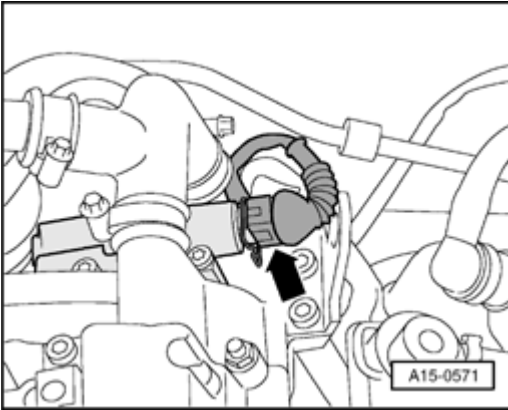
Disconnecting Connector At Camshaft Adjuster
